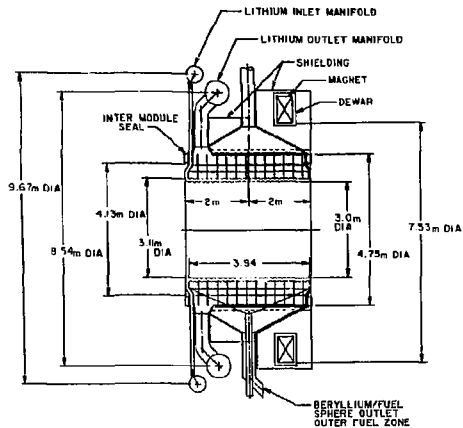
Component arrangements and dimensions of the Fusion Breeder Reactor reference liquid metal direct cooled module assembly - sheet 2.
